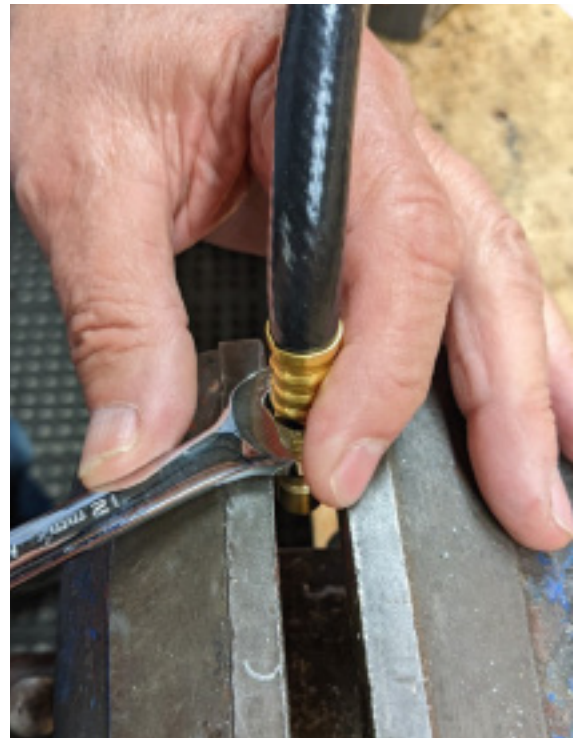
Plug Removal Process – Unthread hose from Male Plug.
